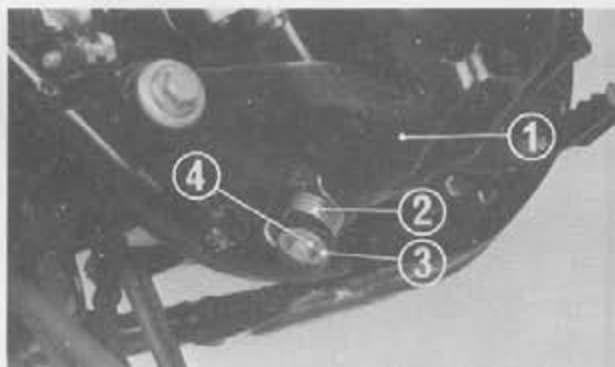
(1) Step arm (2) Step return spring (3) 8 mm plain washer (4) 1.6 mm split pin
